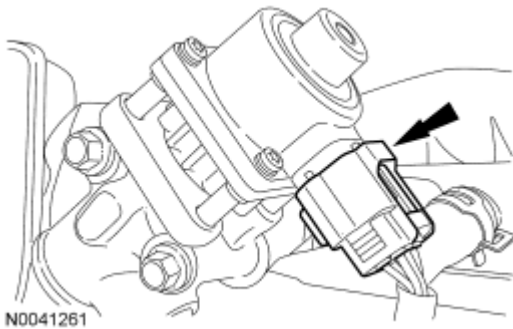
Locating Exhaust Gas Recirculation Valve Electrical Connector
